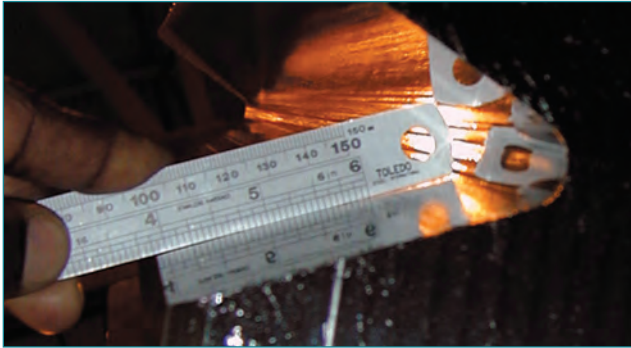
New gear profile with straight edge showing convex shape. (Photo courtesy of The Falk Corp., Milwaukee, WI.)
